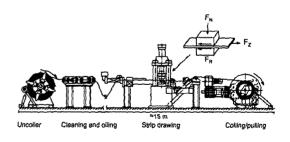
Strip-drawing tester and tools [5], [6]
